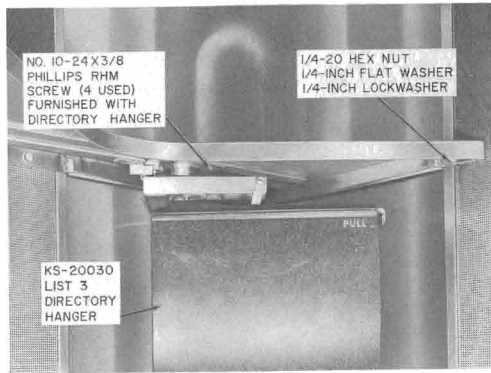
B-699052 Shelf Assembly with KS-20030, List 3 Directory Hanger
